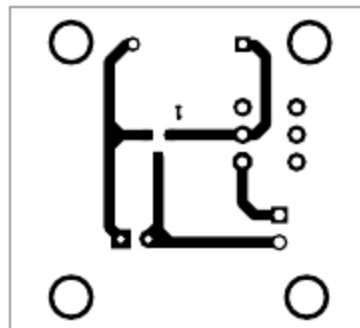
Actual-size PCB layout of torchlight in normal mode
